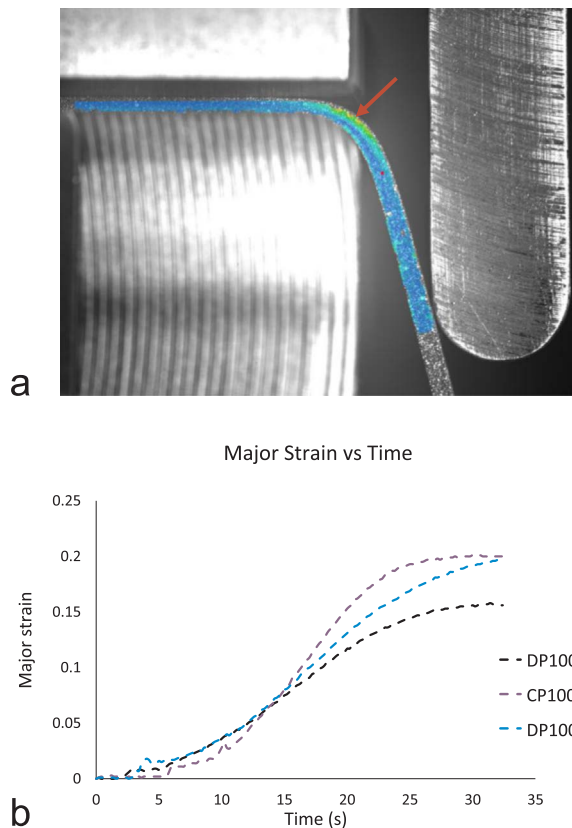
a) Major strains measured at the top surface of the specimens. Red arrow shows the location where the highest strains occur during flanging. The specimen thickness is 1.2 mm. b) Plot of the major strains during flanging for: DP1000 untempered (1.2 mm), DP1000 tempered (1.6 mm) and CP1000 steel (1.3 mm).
